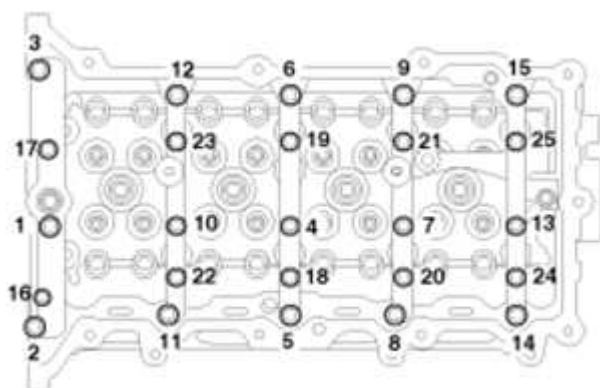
Camshaft Bearing Cap Bolts Tightening Sequence
